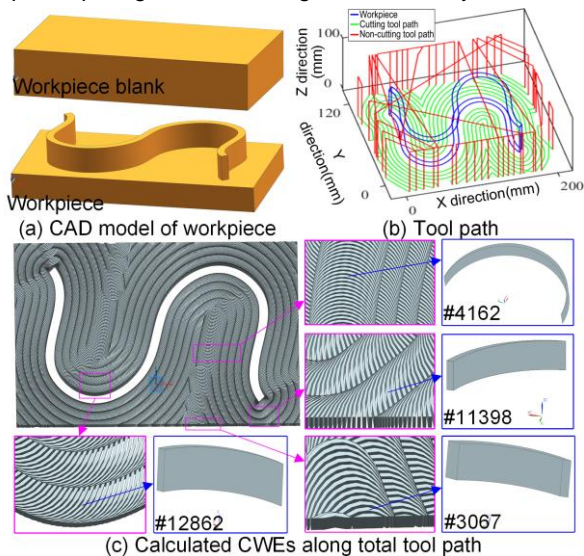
The calculated CWEs in S-shaped workpiece milling.
